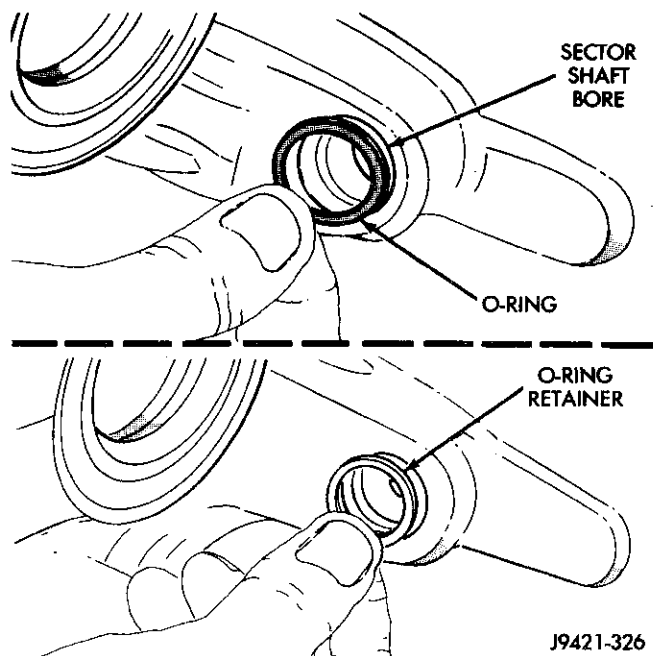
Sector Shaft O-Ring And Retainer Installation
